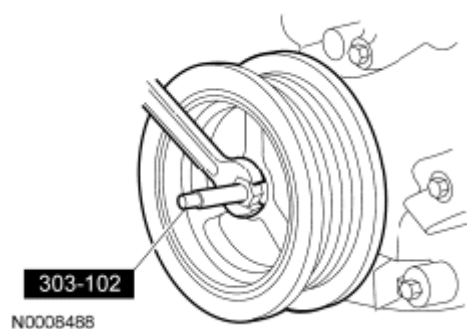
Identifying Crankshaft Vibration Damper Installer
